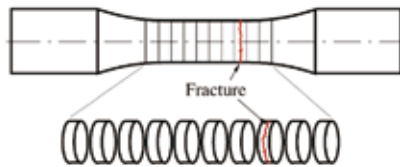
Fatigue failure at the weakest section. One smooth specimen can be assumed as a set of many small disk specimens
